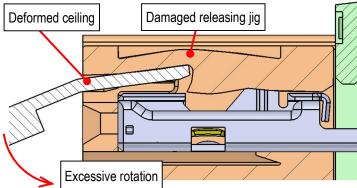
Deformed ceiling, Damaged releasing jig
